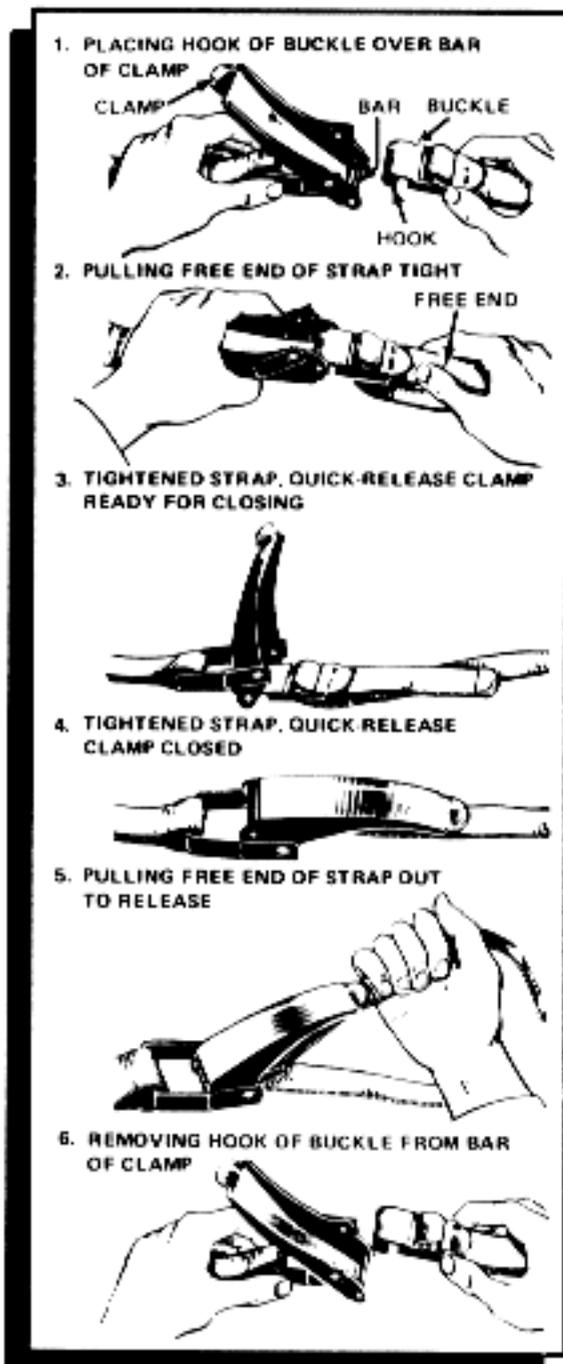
Adjusting quick-release strap and clamp assembly.
